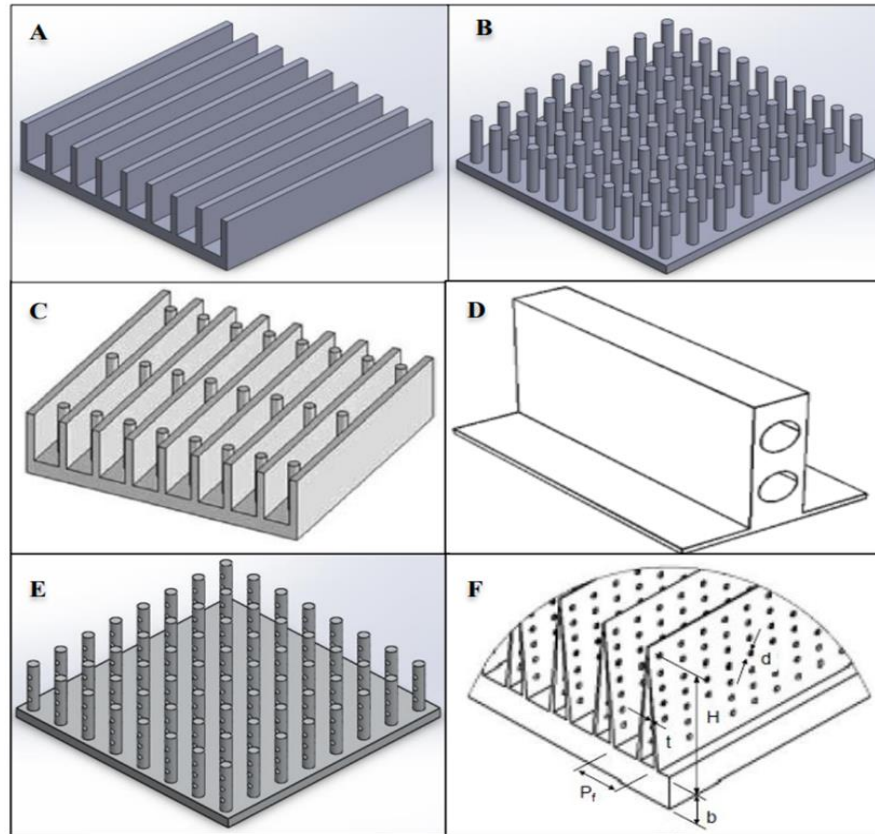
Different types of fin: (A) solid plate fins; (B) solid pins; (C) compact plate-pins; (D) perforated plate; (E) perforated pins; and (F) perforated folded fin heat sinks [10].
